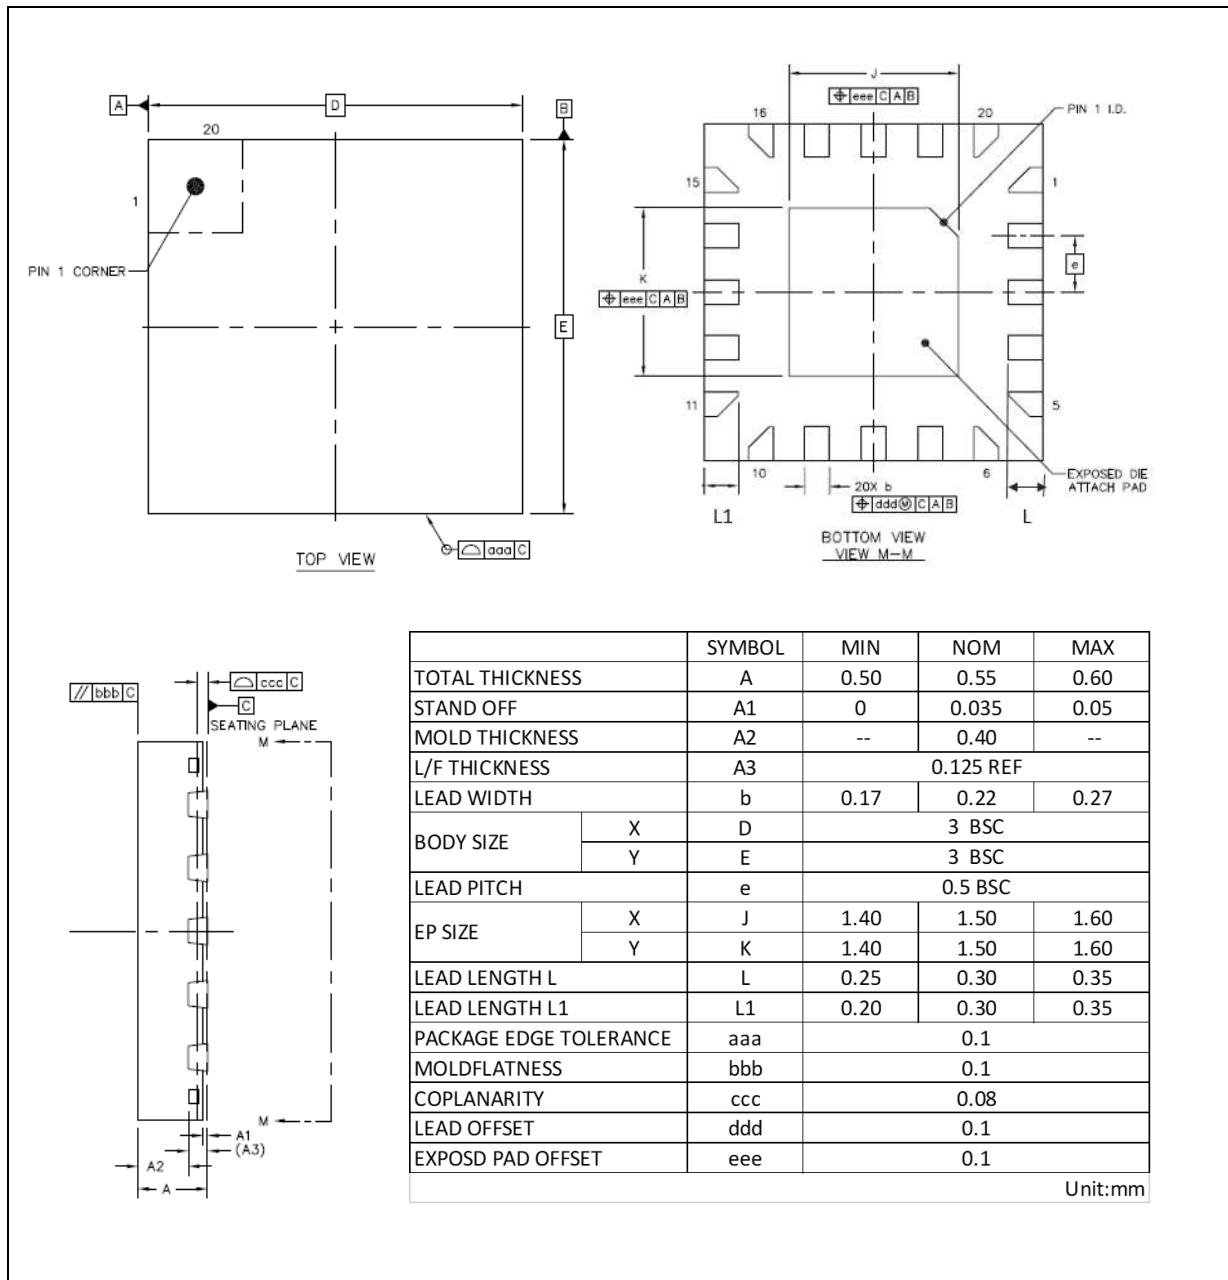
QFN-20 Package Dimension for MS51XB9BE
